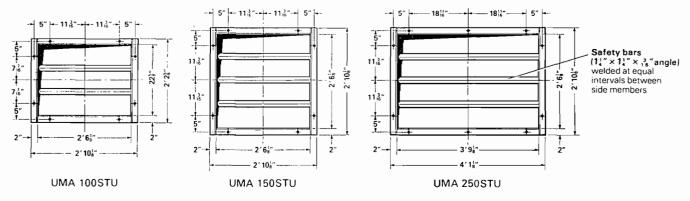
Aperture and mounting-flange dimensions for Sack Tipping Units
